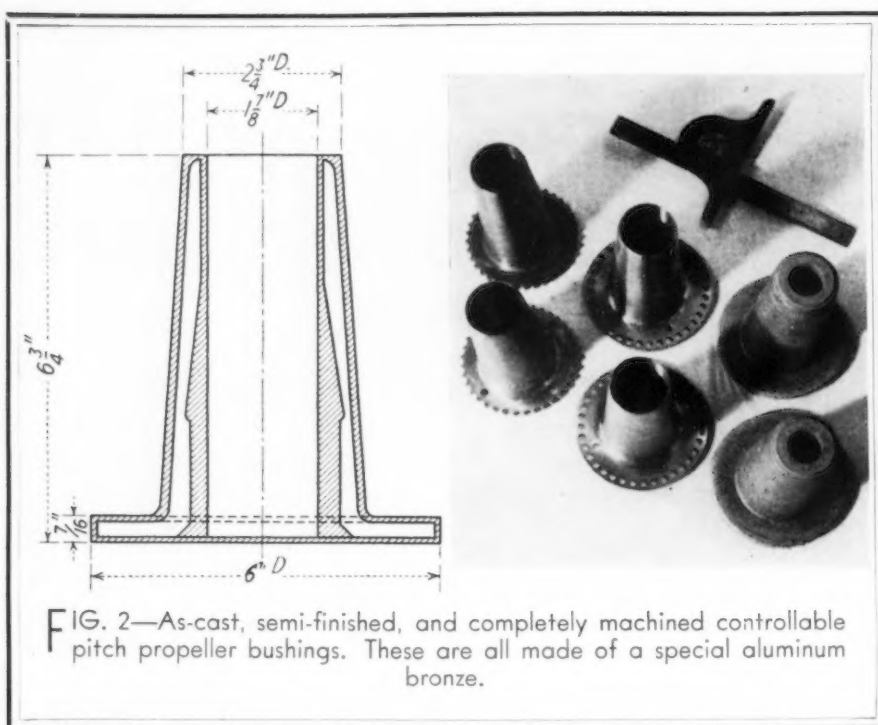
As-cast, semi-finished, and completely machined controllably pitch propeller bushings. These are all made of a special aluminum bronze.
